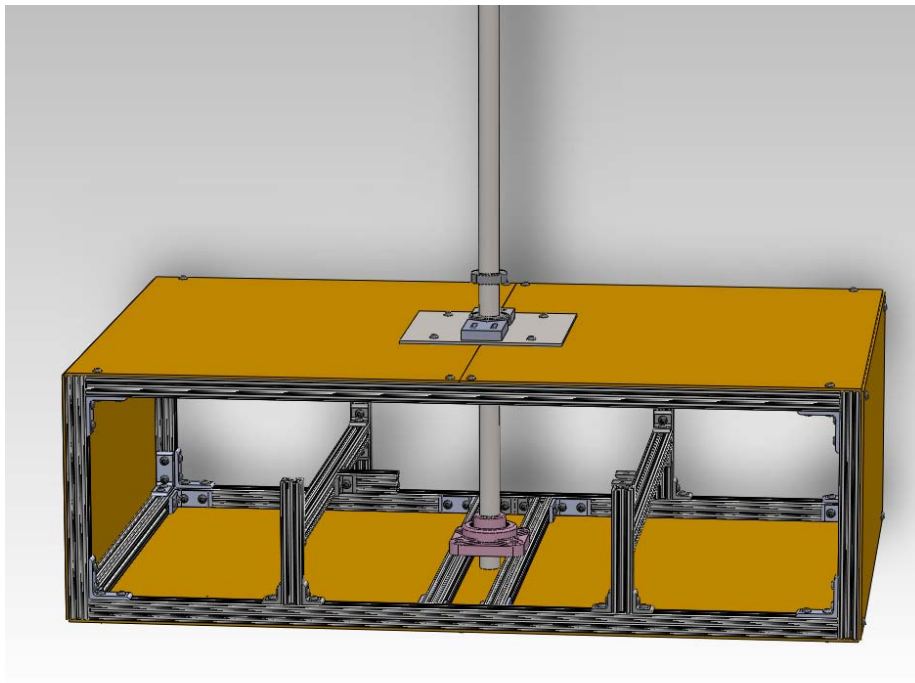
CAD Model of the Drive Shaft Subsystem,
